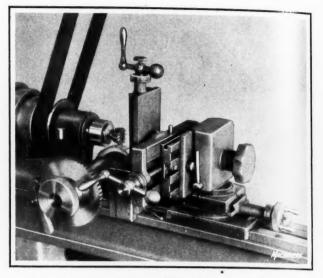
Machining Teeth on a Milling Cutter by the Use of the Milling Attachment
